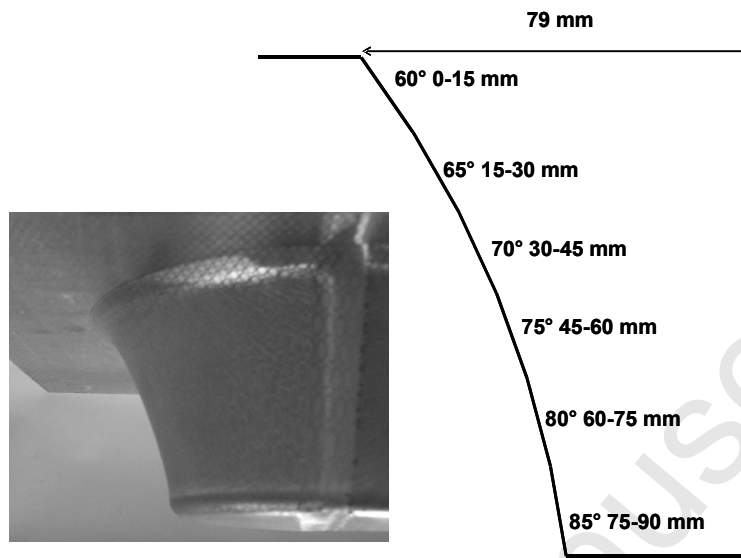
Detail of the benchmark formability test performed on a truncated conical shape with varying drawing angles ψ with the depth. The picture shows a component made from a tailored welded blank of AA1050-H1111 produced by friction stir welding with a uniform thickness of 2 mm.
